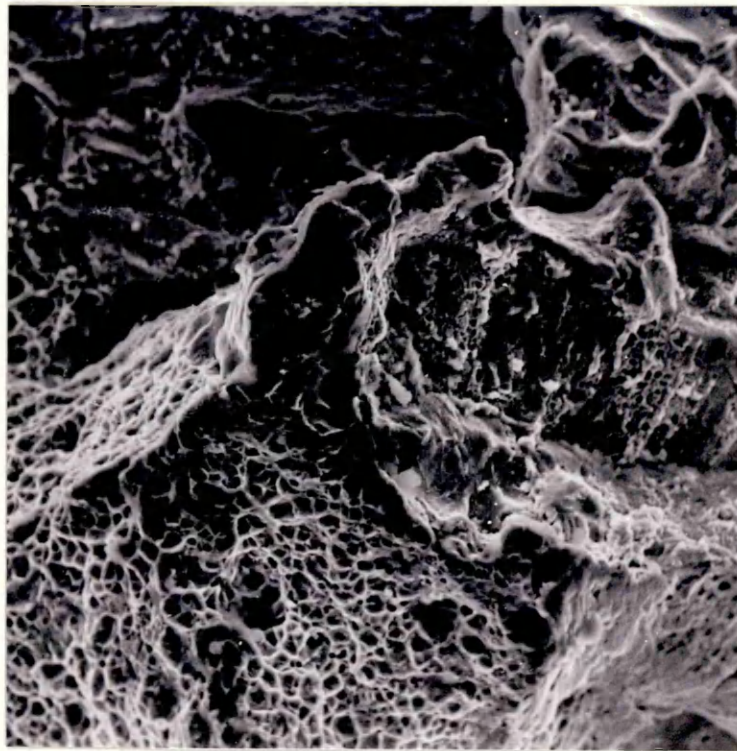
Occurrence of Partial Ductile Fracture at Edge of Environmental Crack Ringed in Figure
